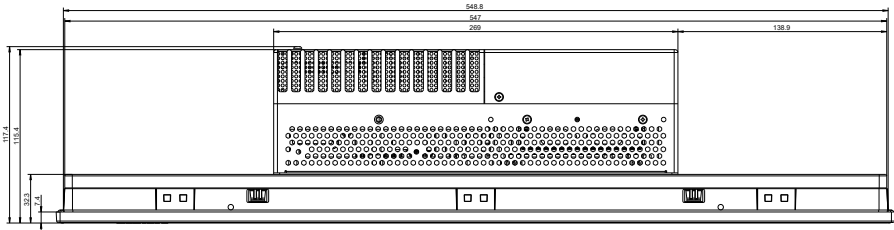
Housing dimensions of the device VR4x21, left side view
